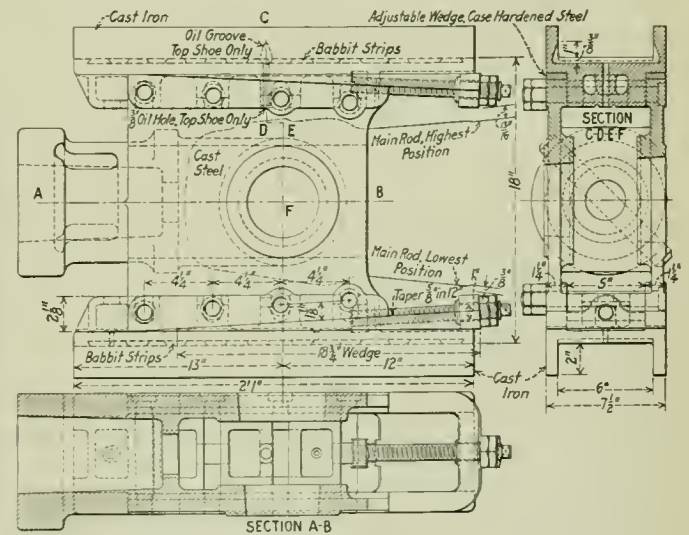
Drawing Showing Alterations in Adjustable Crosshead
